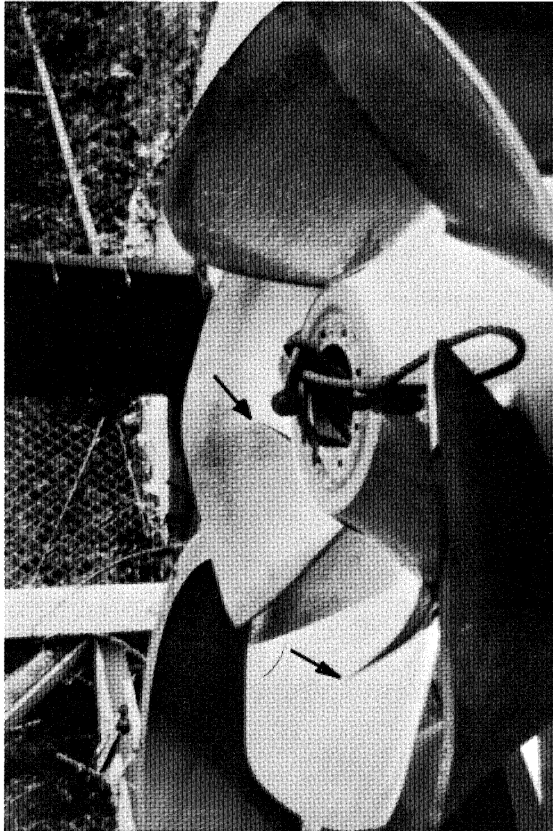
IMPELLER BLADE CRACKS (AT ROOT)
